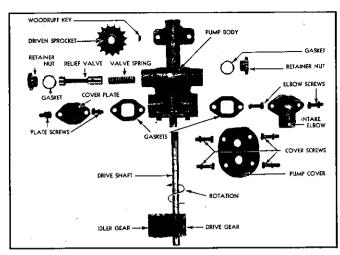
Six Cylinder Lubricating Oil Pump Details for LA, LB, LC, and LD Models.
